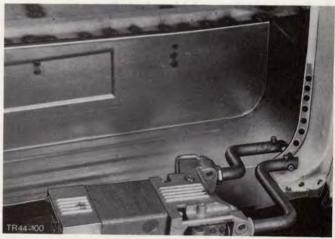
Spot weld entrance step at lower B pillar.
